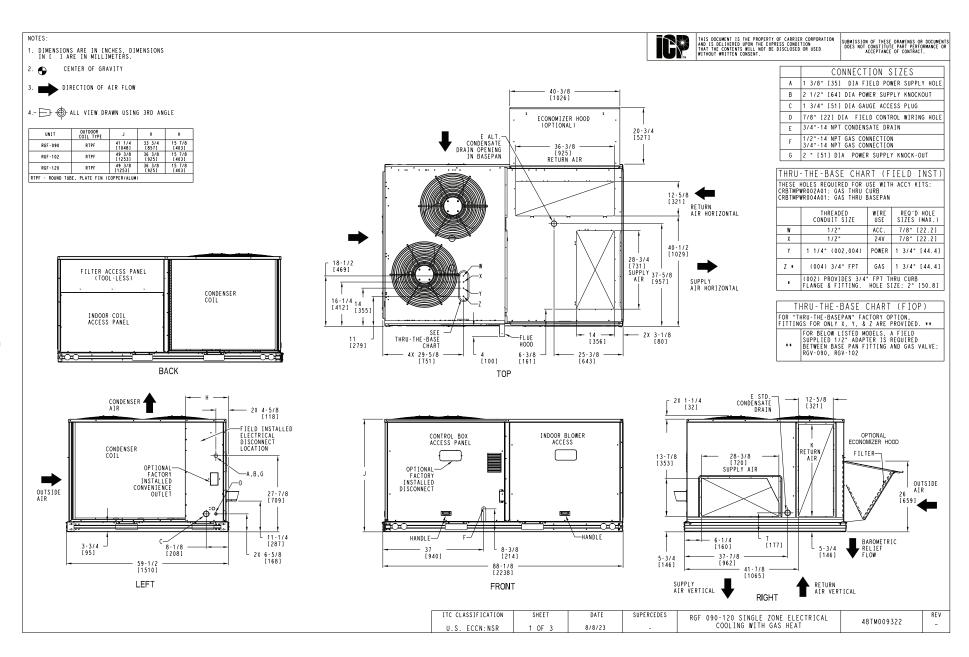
Unit Dimensional Drawing - Sizes 090, 102, 120
